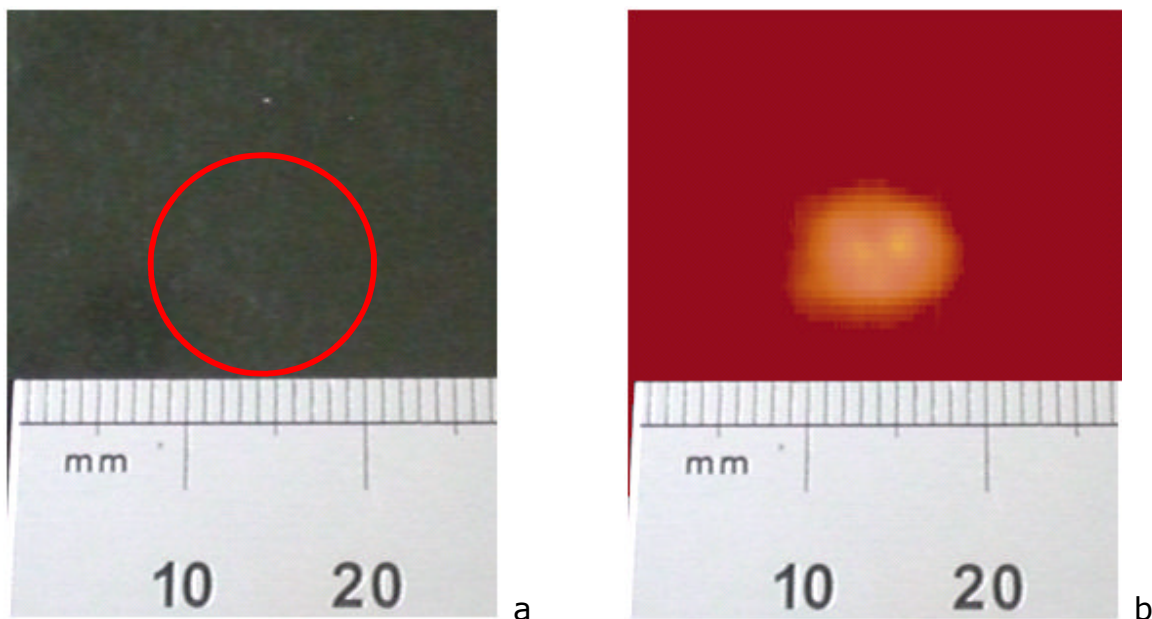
PA66-i-GF35 plate impacted at 3.5 J, visual inspection (a), C-Scan image (b)
